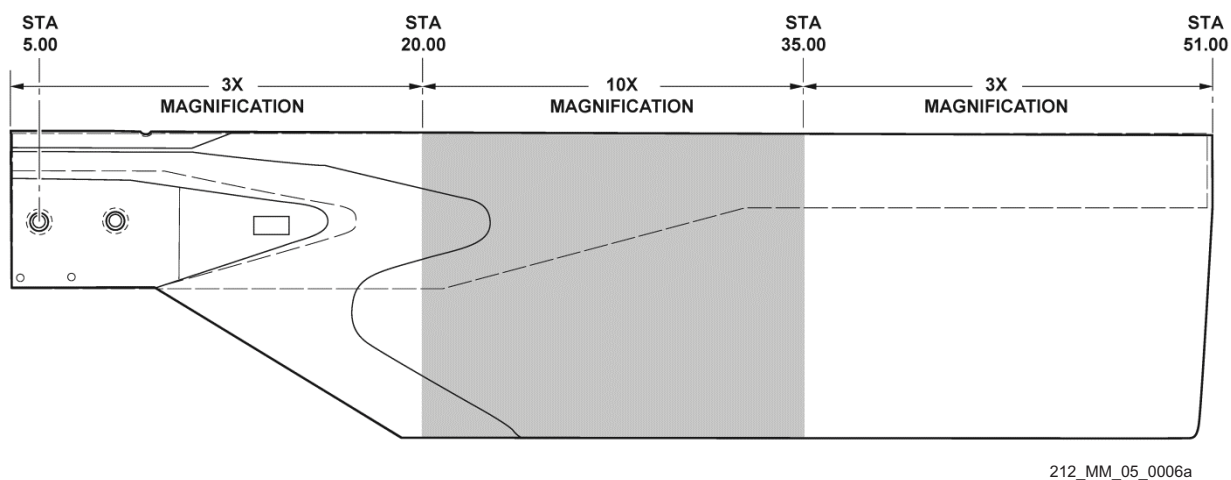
A. Tail Rotor Blade - Detailed Inspection
